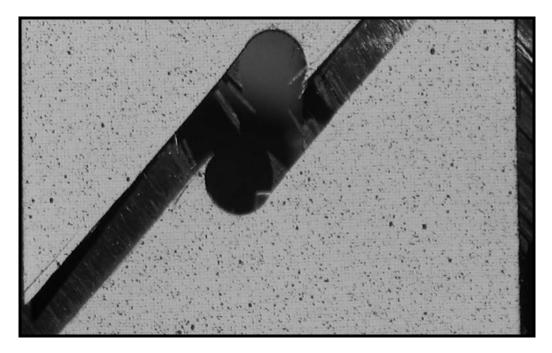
Final fracture of the waterjet machined plate demonstrating that the fracture pattern
